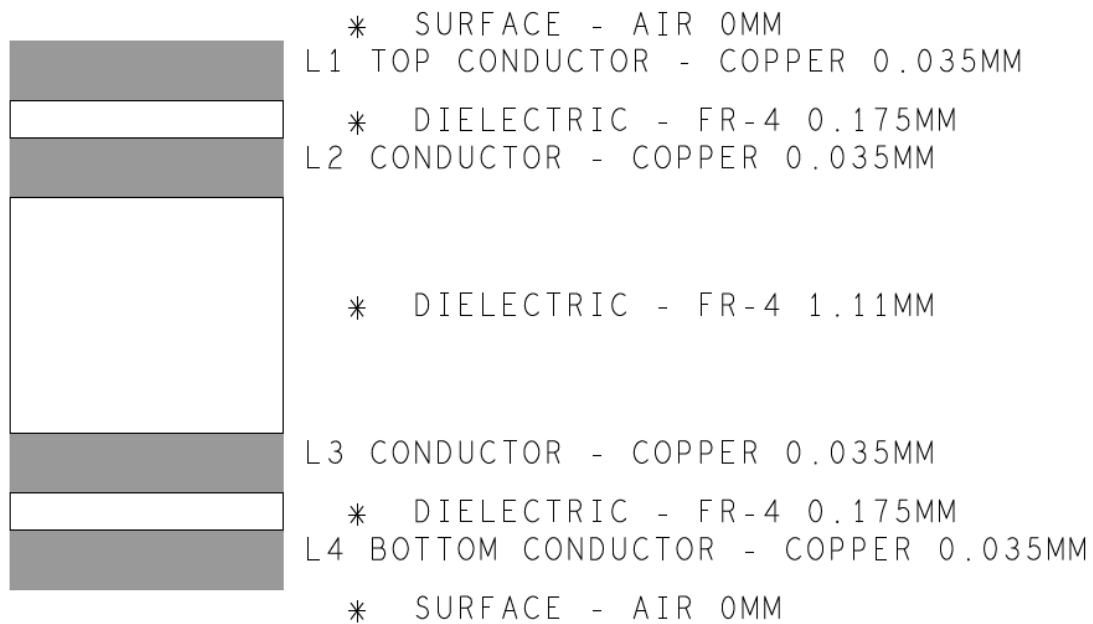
LP-EM-CC2745R10-Q1 Board Stack-Up
